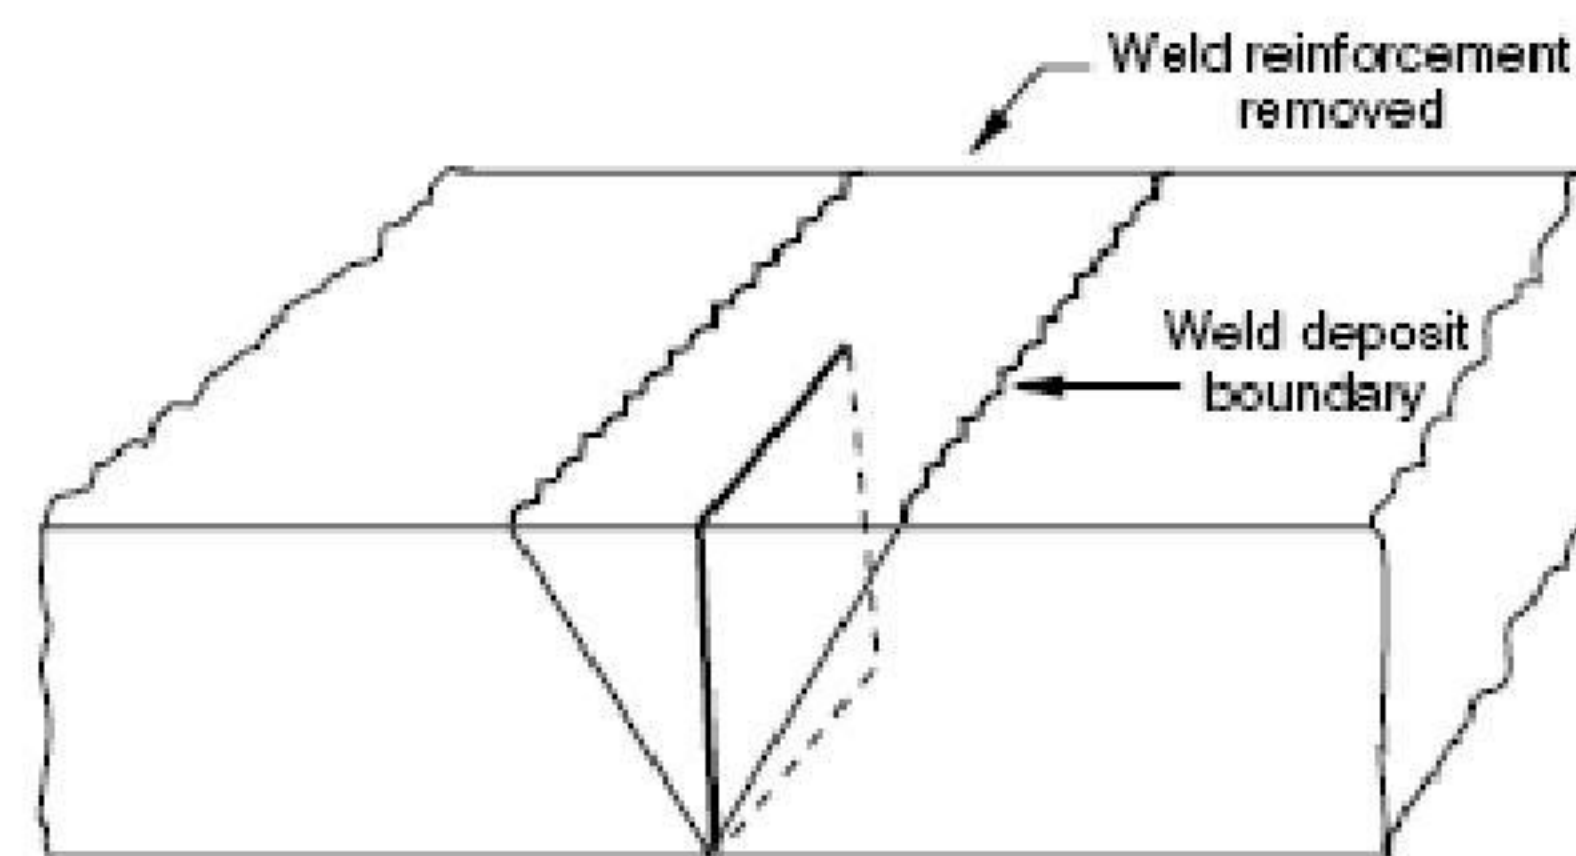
Location of Notch for Weld-metal Specimen
